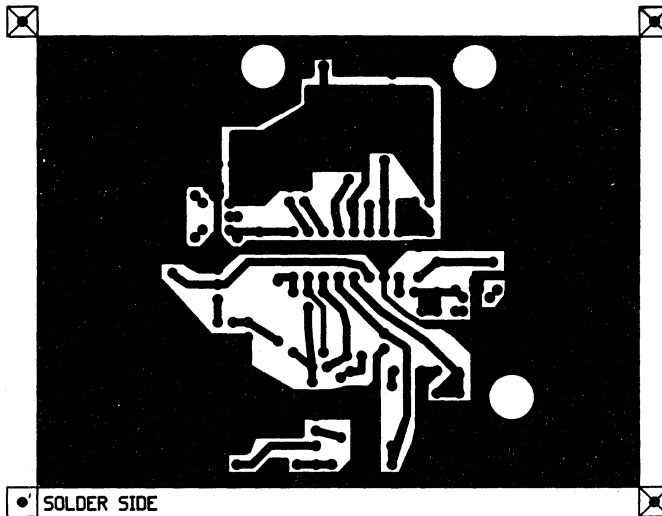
MC3371P PC BOARD CIRCUIT OR SOLDER SIDE AS VIEWED THRU COMPONENT SIDE
